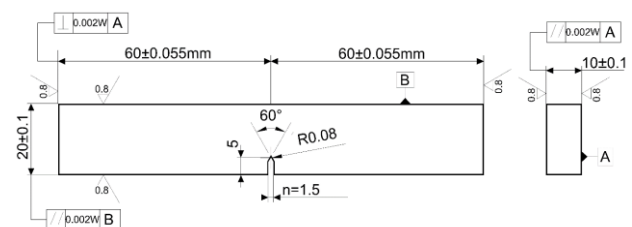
Schematic drawing of the SEN (B) specimen with dimensions
